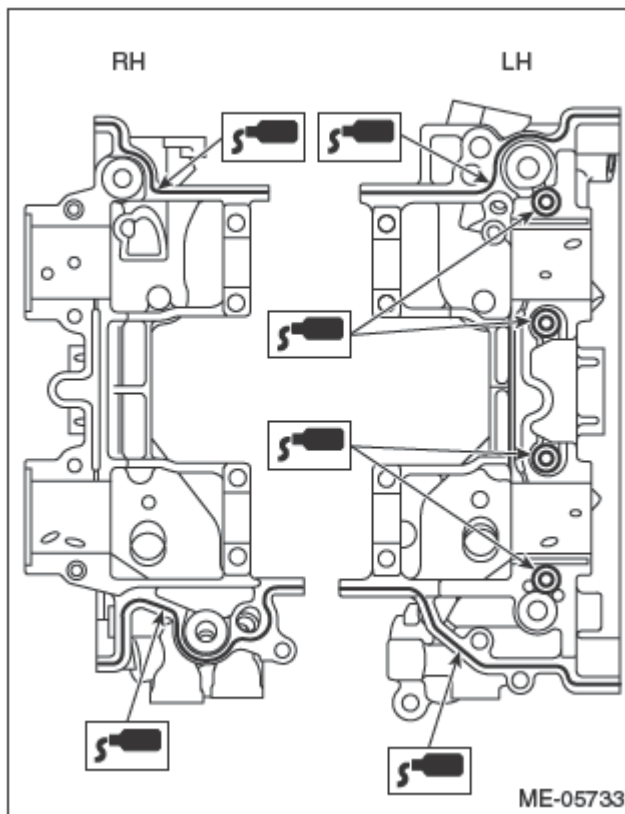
Identifying Engine Oil And Liquid Gasket Applying Areas
